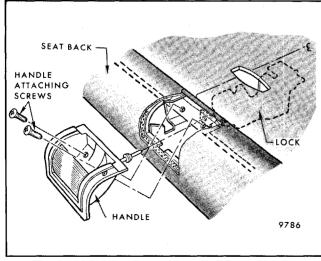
Folding Second Seat Back Lock Handle Installation - A Styles
